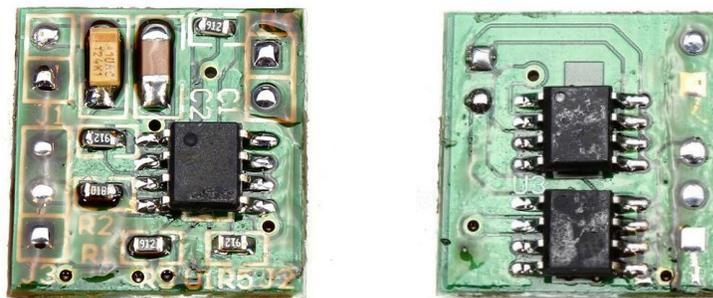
Top and Bottom view of new 5A Motor Drivers
